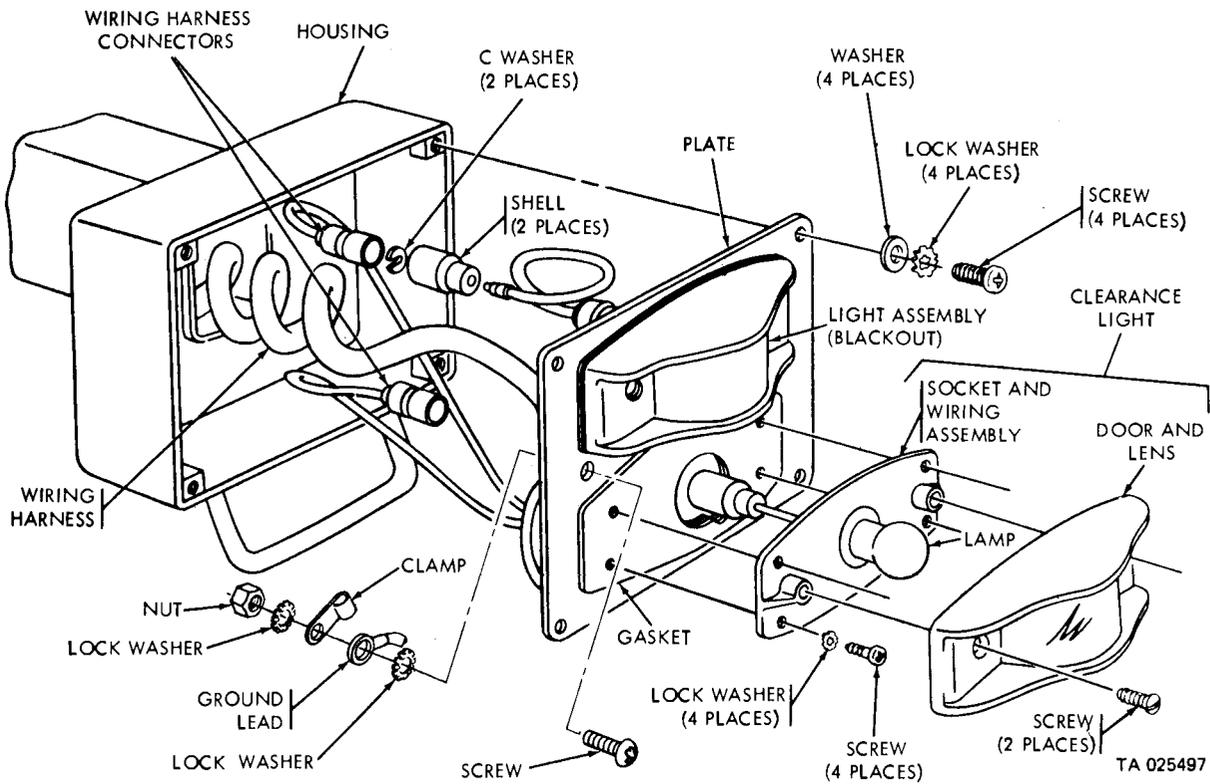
Retractable clearance light housing assembly (semitrailer No. 1 through 200).
